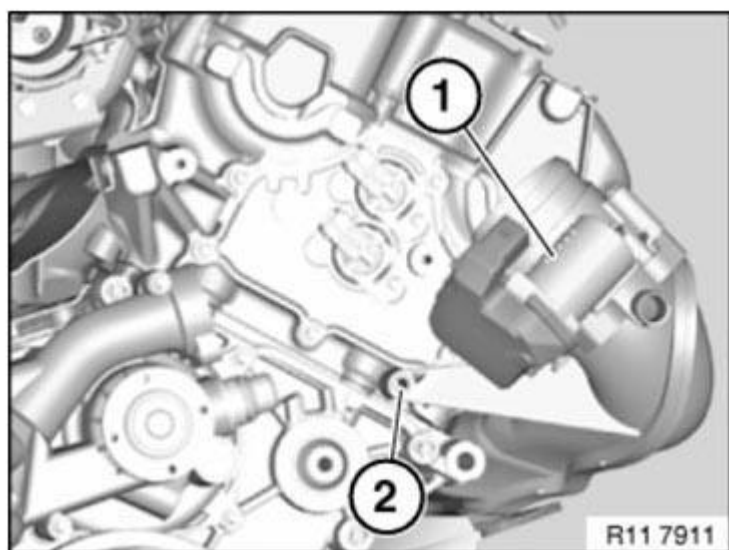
Identifying Throttle Valve Assembly (N63) And Holder Screw On Intake Plenum
